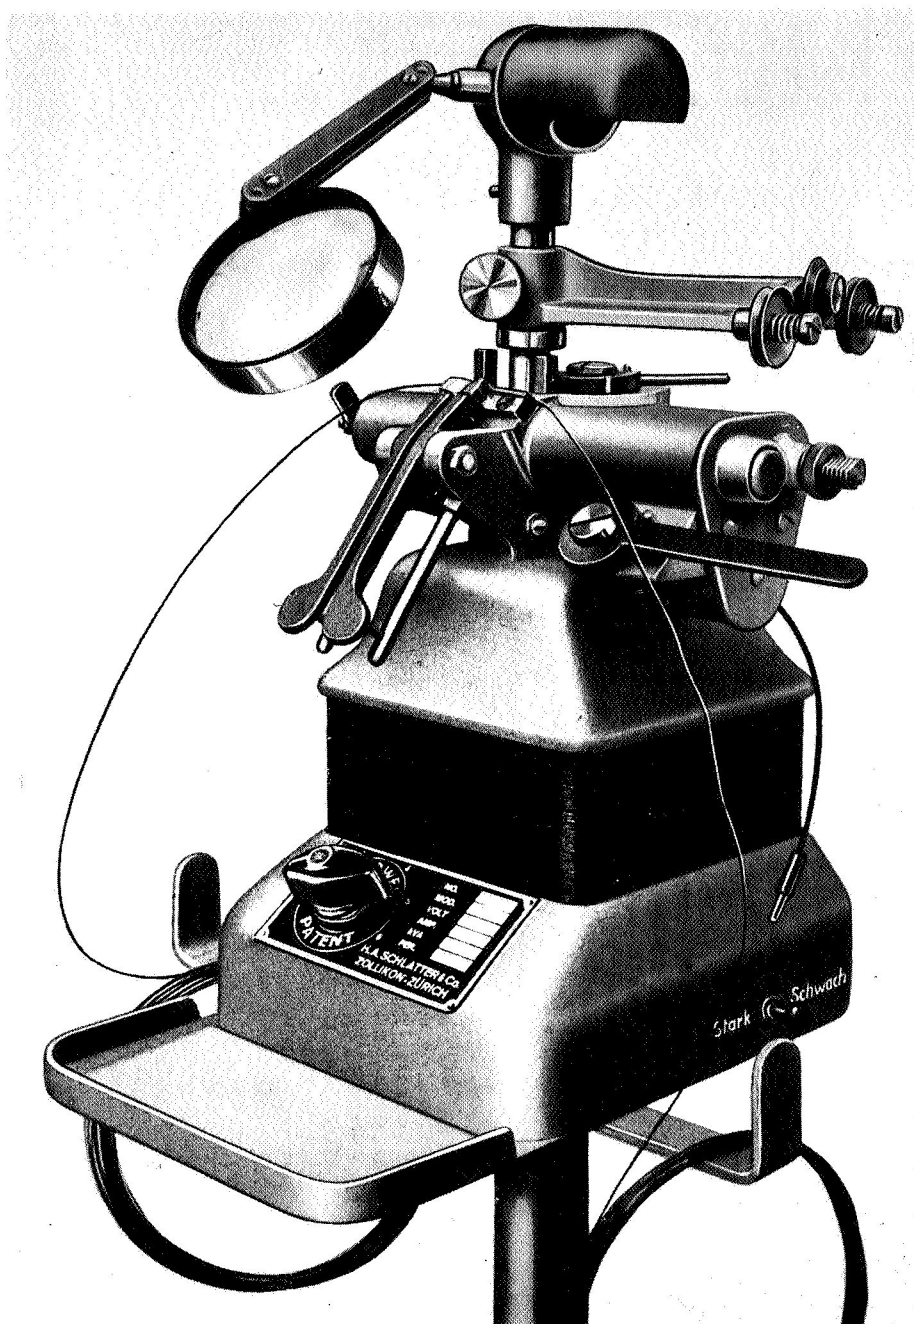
Flash butt welder for joining refractory metal wires, strip, etc.
